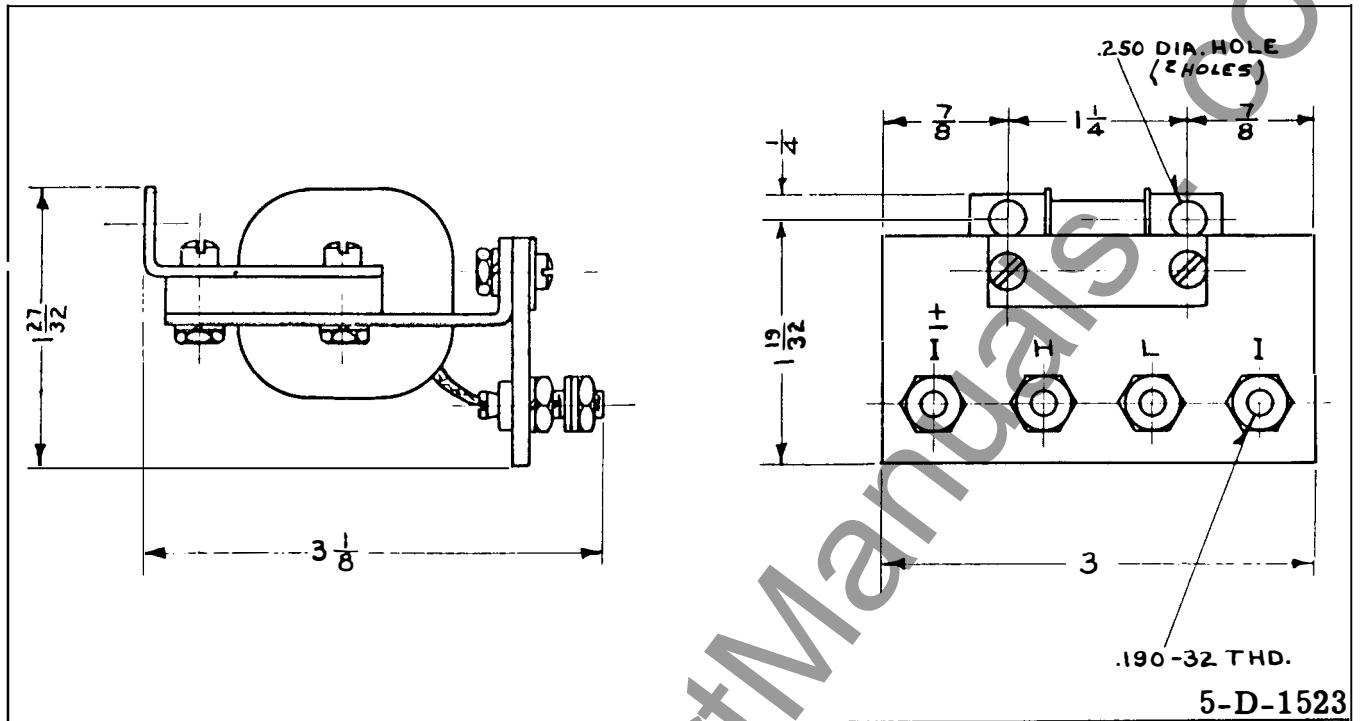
Outline of the Test Milliammeter Auxiliary Transformer.
